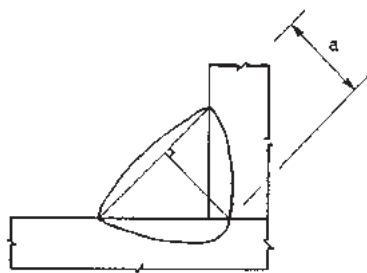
Throat thickness of a deep penetration fillet weld
